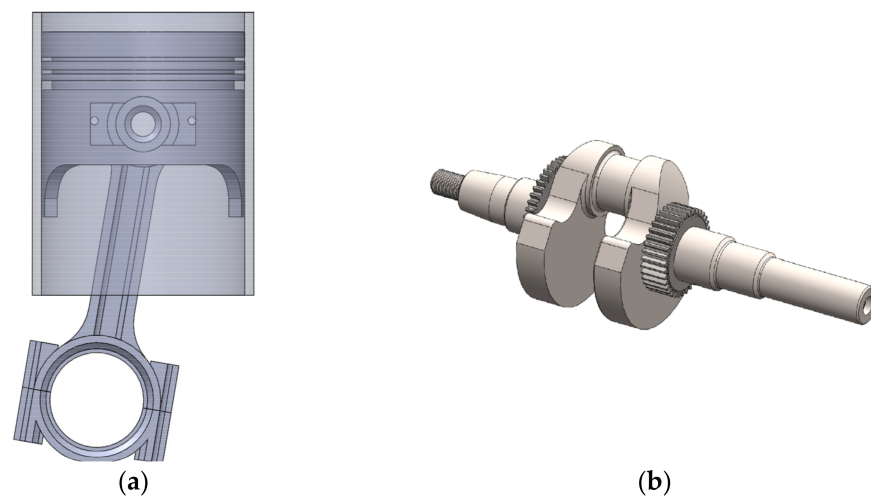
Internal combustion engine geometry (a) piston-connecting rod and (b) crankshaft.
